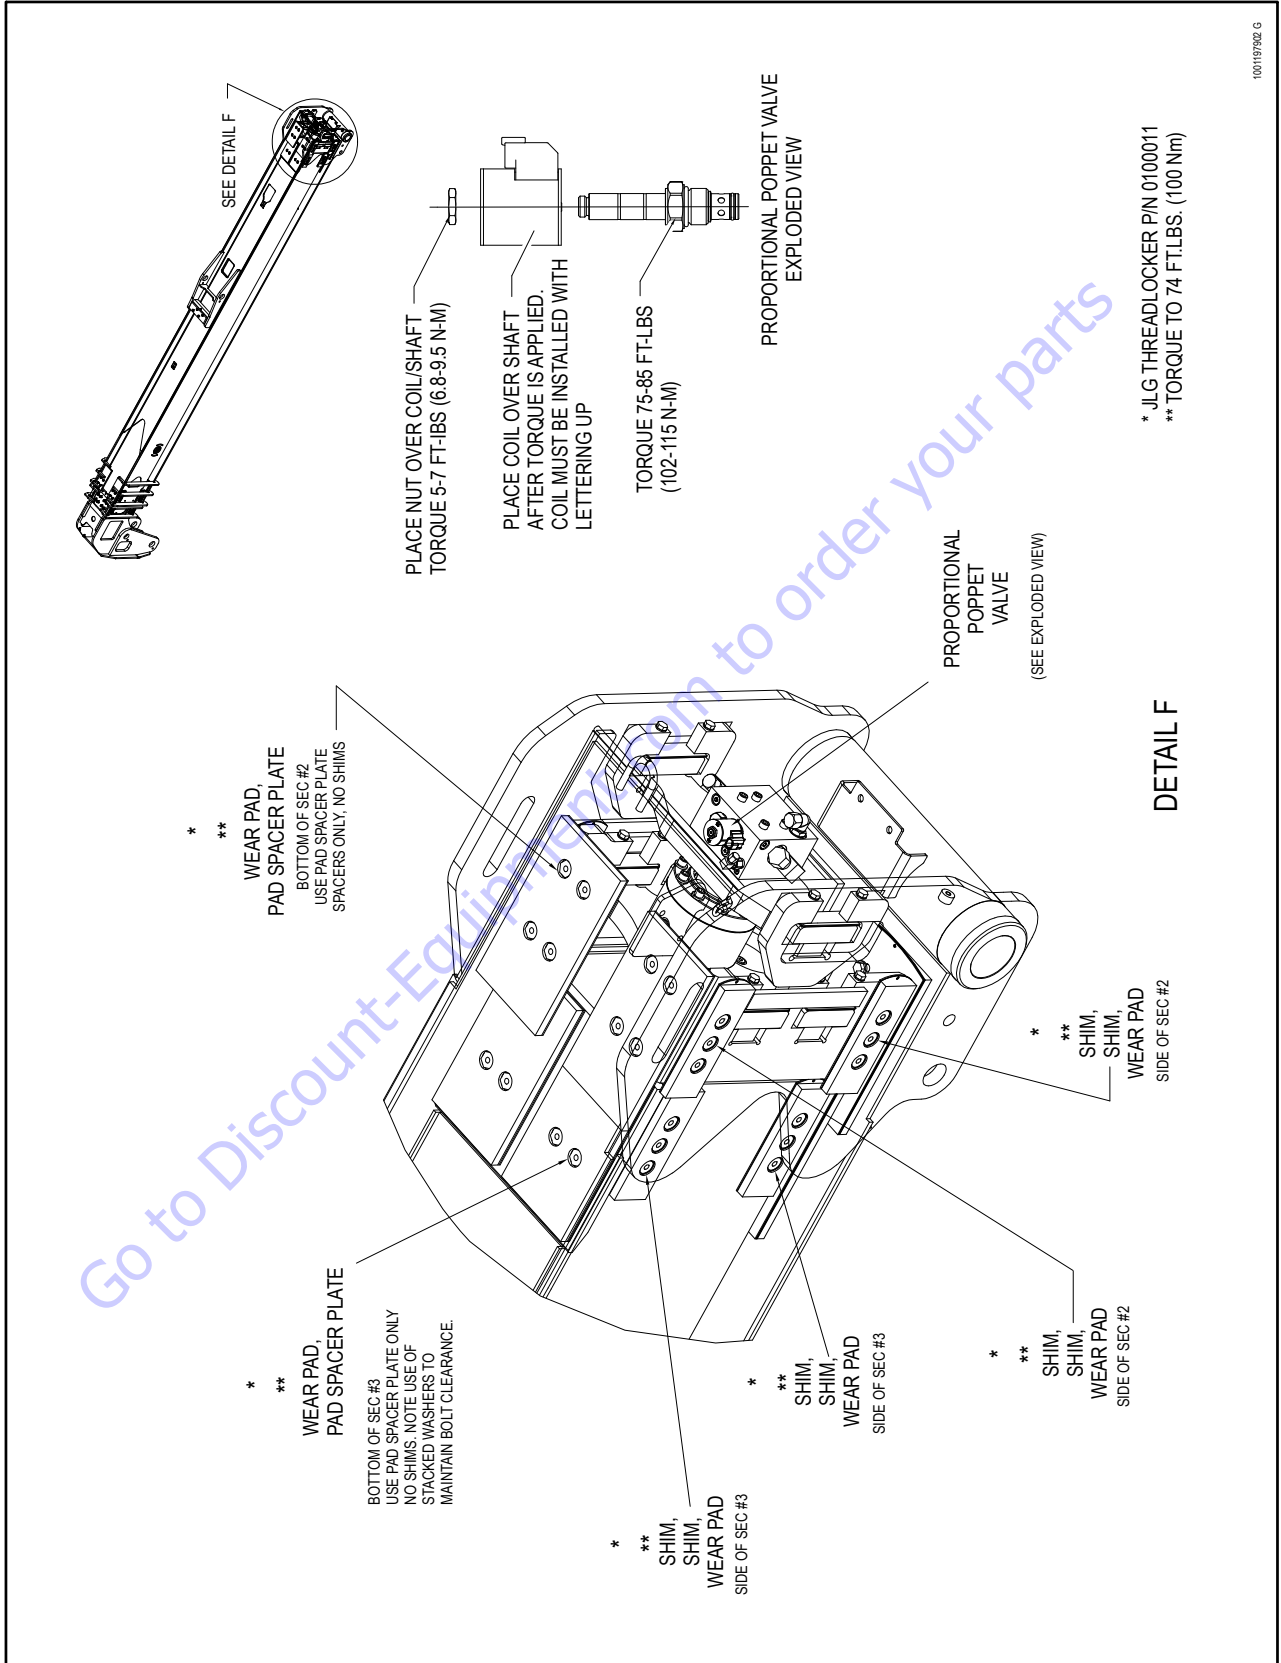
Tower Boom Assembly - Sheet 3 of 6
